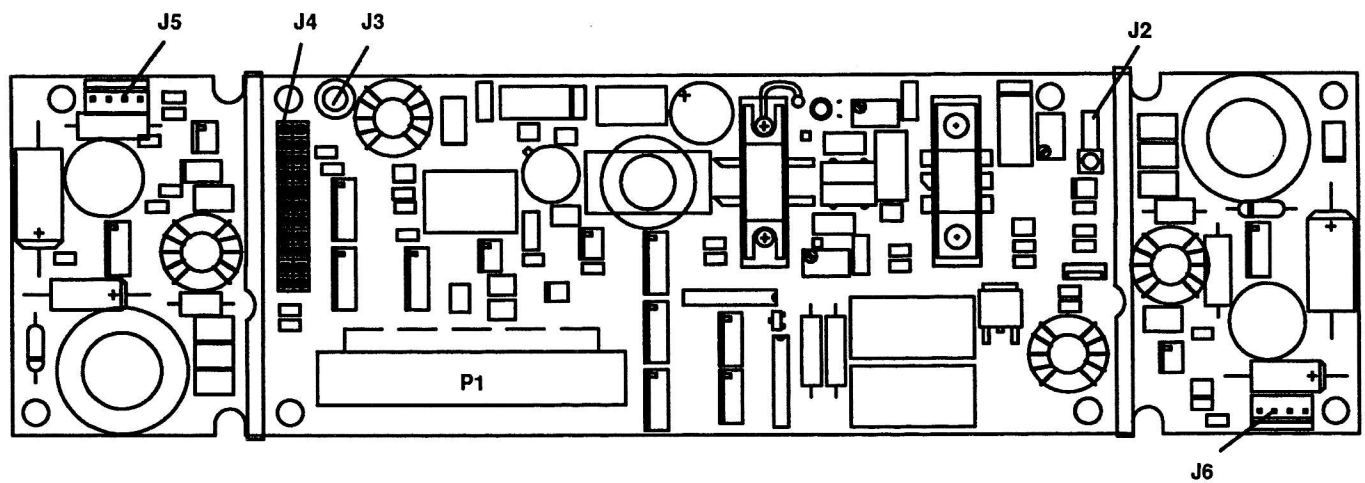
A6A2 Synthesizer PWB Assembly Component Location Diagram
